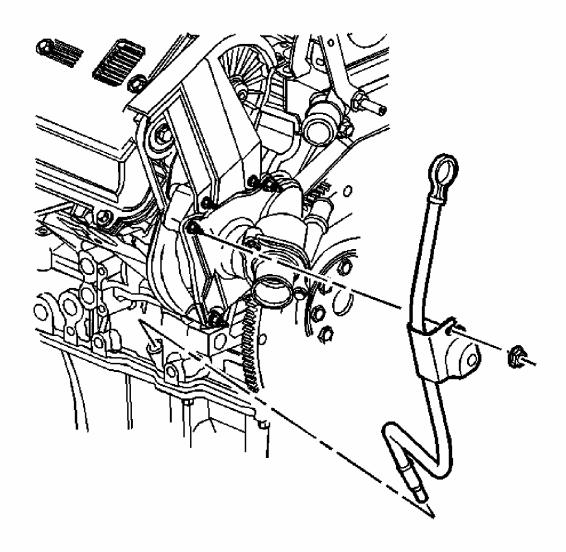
View of Oil Lever Indicator Tube Nut Courtesy of GENERAL MOTORS CORP.
